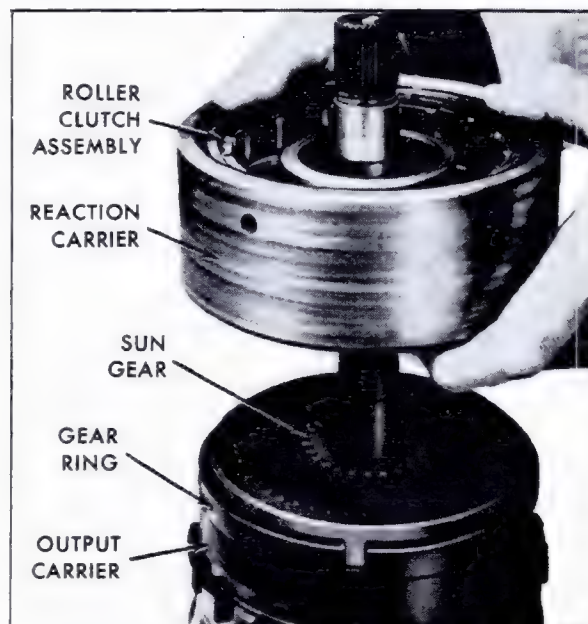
Removing Reaction Carrier and Roller Clutch Assembly
